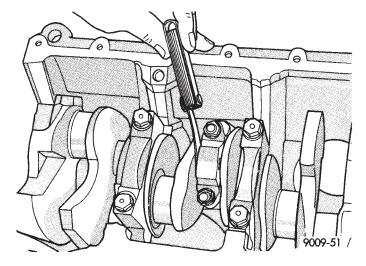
Checking Connecting Rod Side Clearance— Typical
